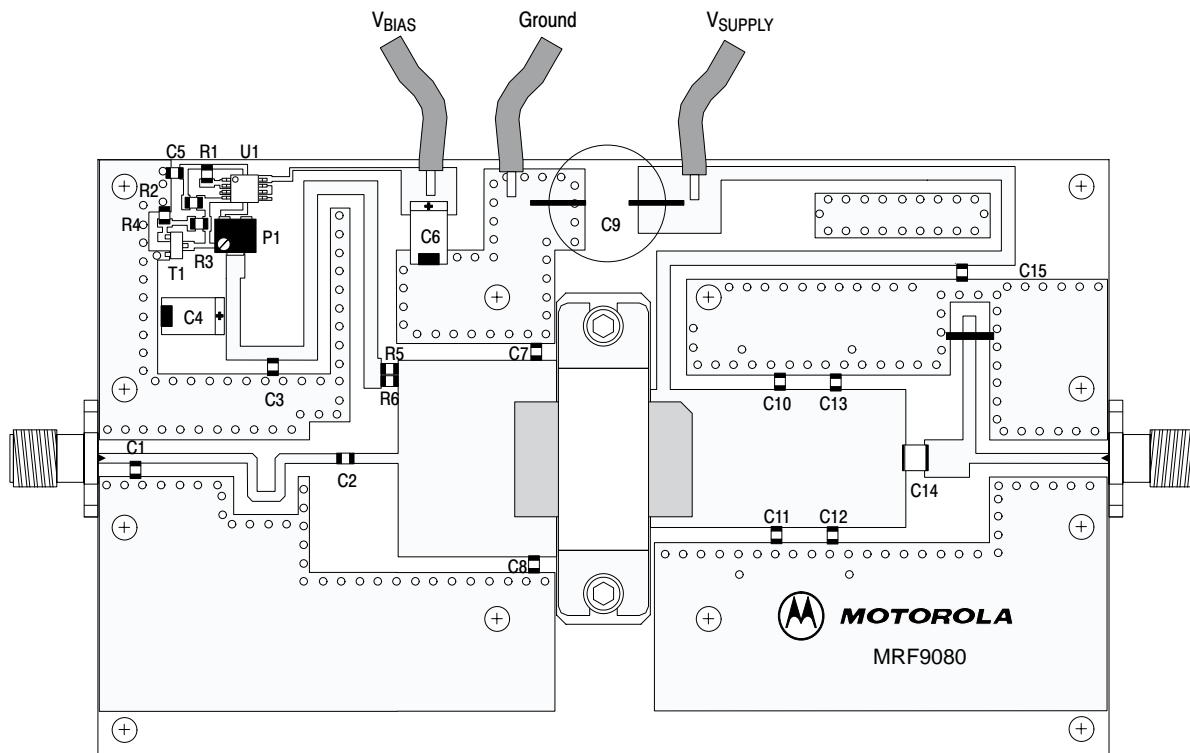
Broadband GSM 900 Optimized Demo Board Component Layout
